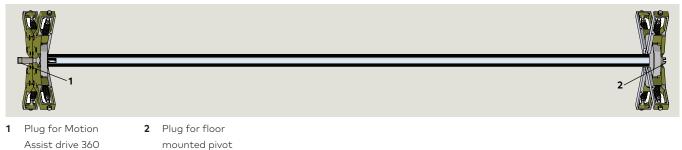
RS6042, 3 wing steel shaft assembly, overhead speed control
